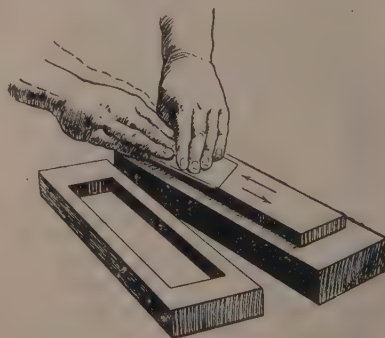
HOLDING PLANE IRON WHEN SHARPENING.
